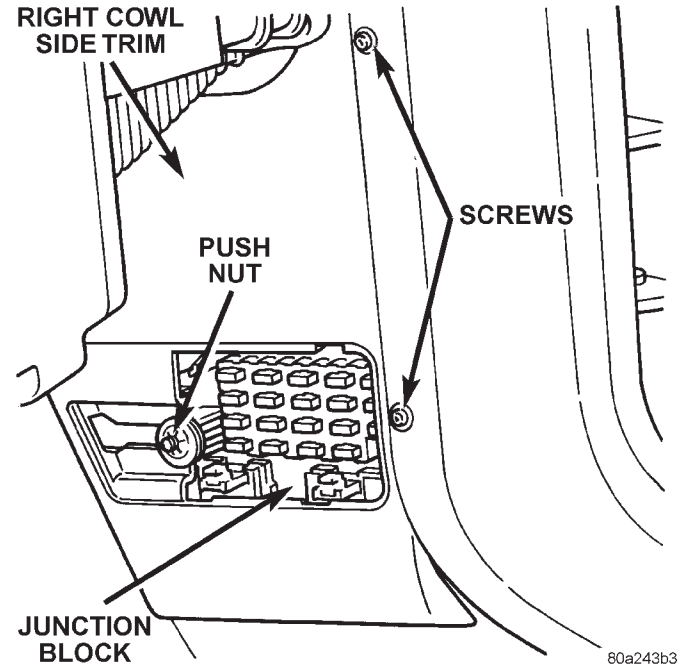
Right Cowl Side Trim Panel Remove/Install
